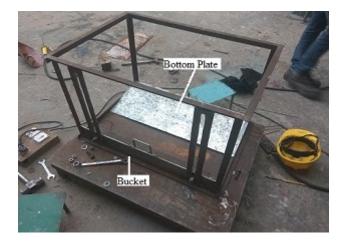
Fabricated structure [Courtesy: JK Lakshmi Cement Ltd.]
